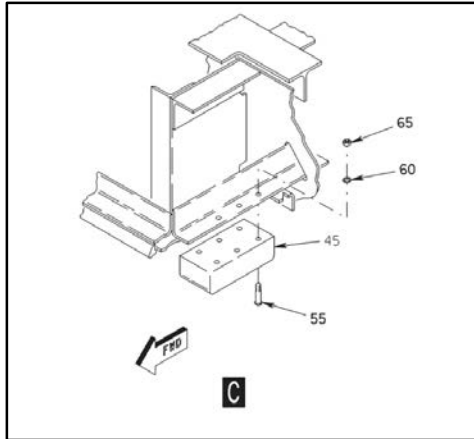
C-130J Aft Cargo Door Rub Strip Drawing
